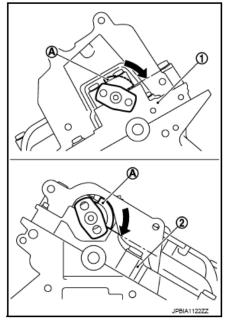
Identifying Actuator Motor Mounting Bolt Courtesy of NISSAN MOTOR CO., U.S.A.
